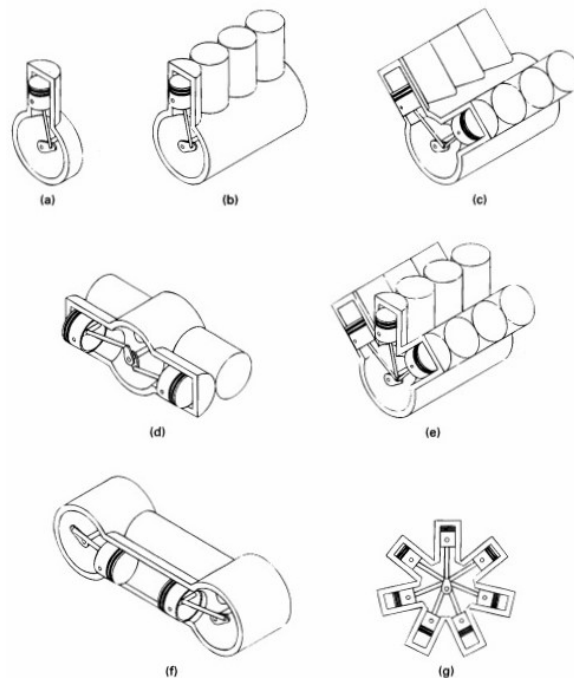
Different cylinder arrangements: a) single cylinder b) in-line or straight c) V lay-out d) flat engine or opposed cylinder e) W lay-out f) opposed pistons g) radial engine [5]
